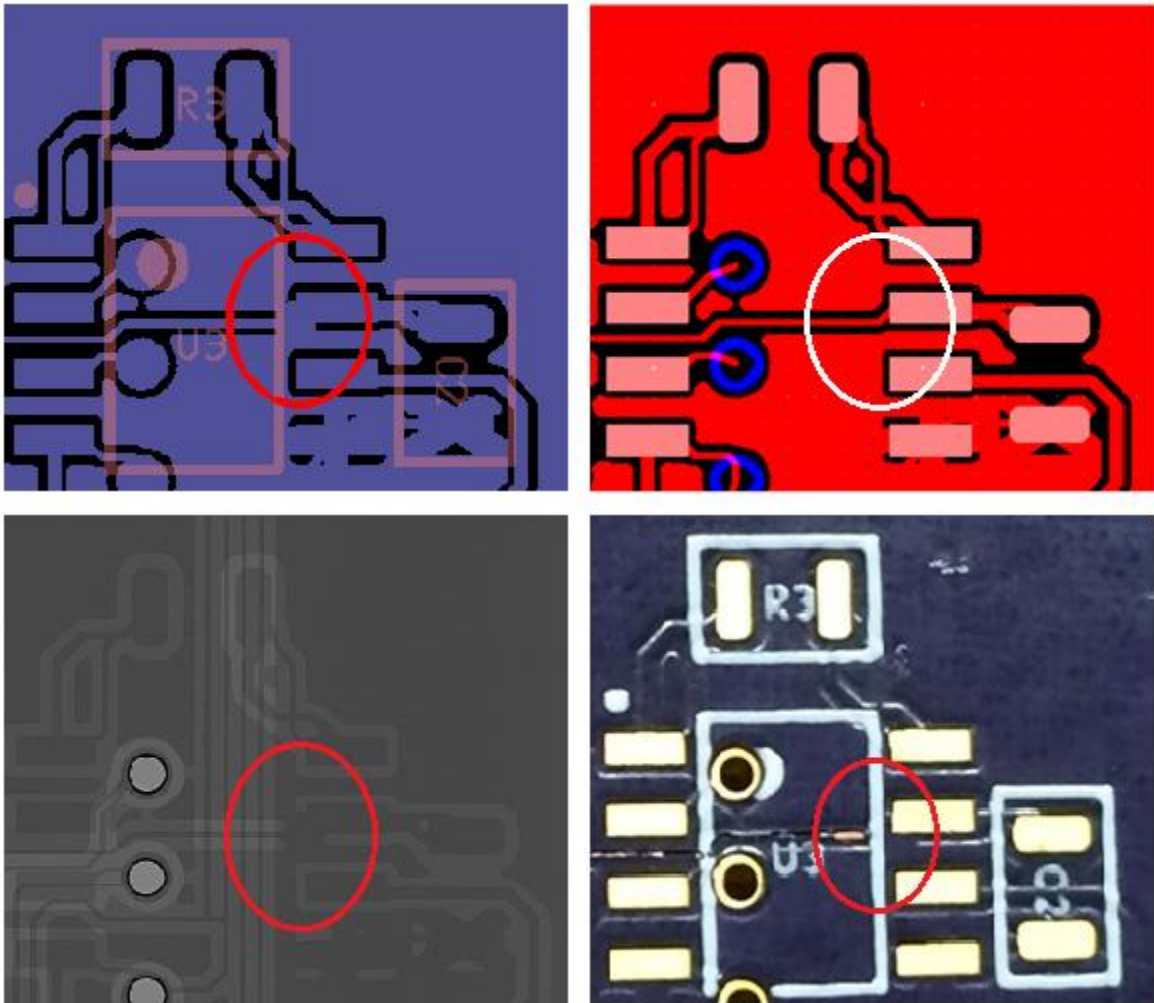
VCC and GND short connection location (top left - OSH park machine layout, top right - Ultiboard layout, bottom left - X-ray image showing the short connection, bottom right - OSH park PCB board subjected to AC wall plug)
